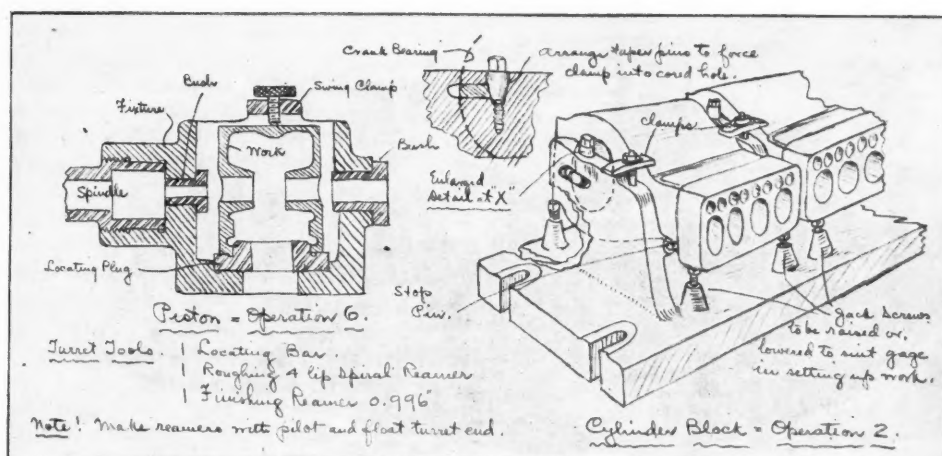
Examples of Free-hand Sketches made by Tool Engineer to explain his Ideas to Tool Designers, illustrating Operation 6, Table I, and Operation 2, Table III
